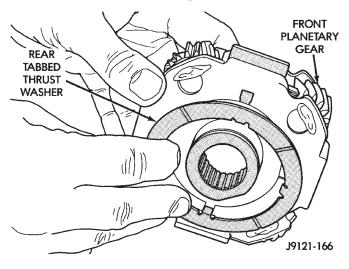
Installing Rear Thrust Washer On Front Planetary Gear
